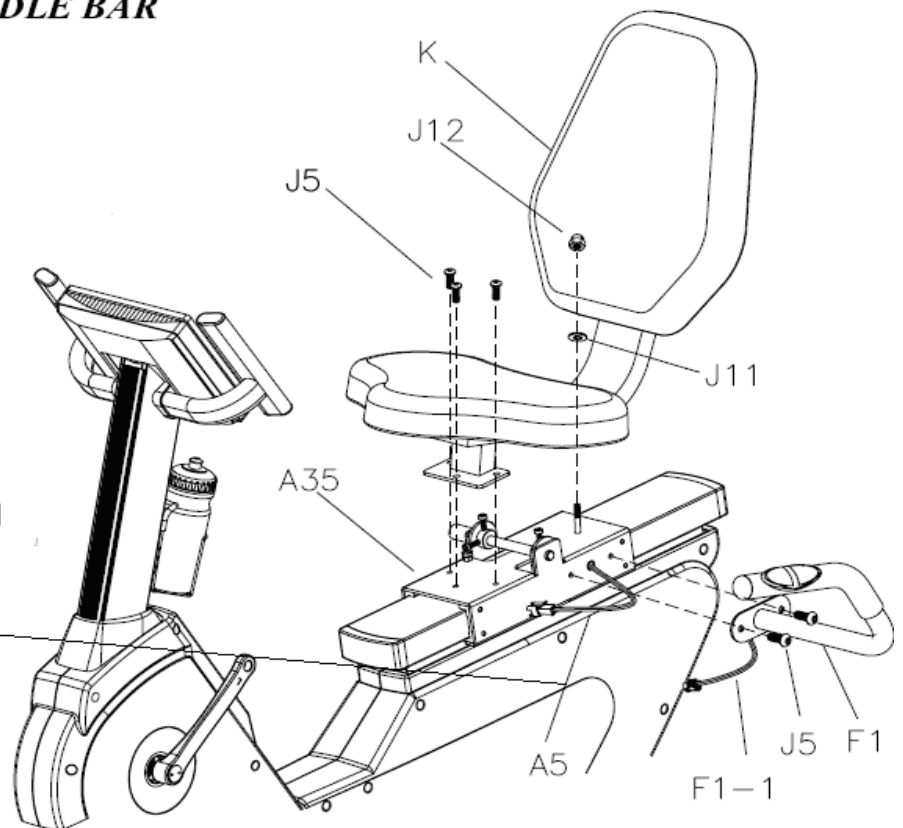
ASSEMBLY FOR SADDLE TUBE & LEFT SIDE HANDLE BAR
